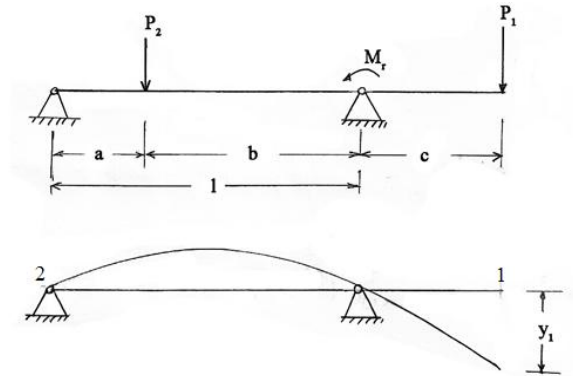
Deflected Axis of the Spindle due to Bending Forces
